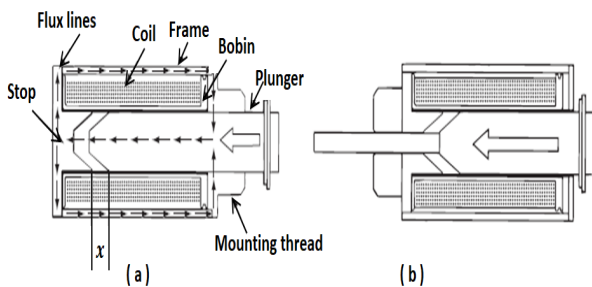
Solenoid construction and its components. (a) pull-type and (b) push type [23].
